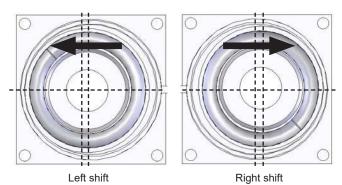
Top View of Main Spring & Spring Flange showing examples of Main Spring & Spring Flange shifting (certain components hidden for clarity)
